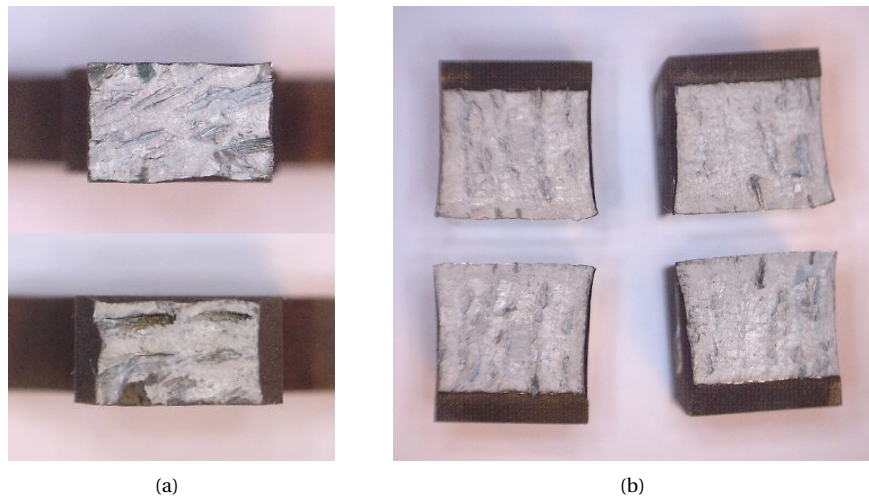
Fracture surfaces of a (a) tensile test specimen and (b) Charpy impact test specimen built in a crosswise pattern, without preheating. Disc shape defects can be noted.
